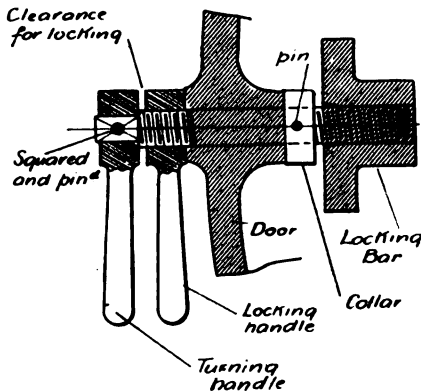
SECTION OF SMOKEBOX DOOR LOCKING DEVICE.
